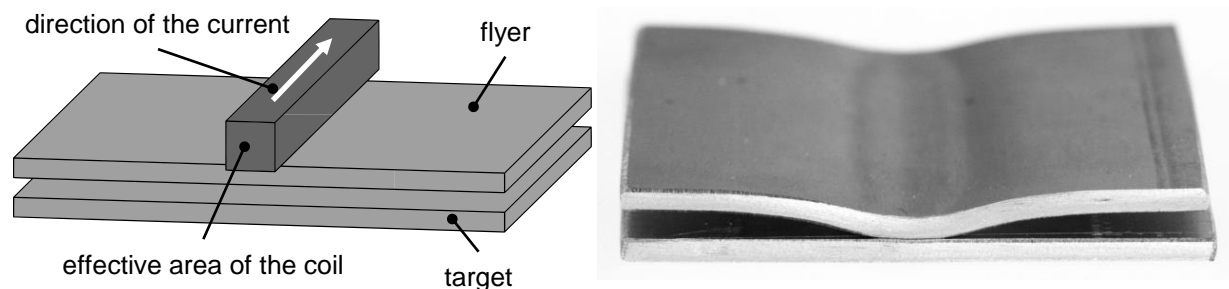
Schematic representation of a simple setup for electromagnetic sheet metal pulse welding (left) and photograph of a joined specimen (right).
